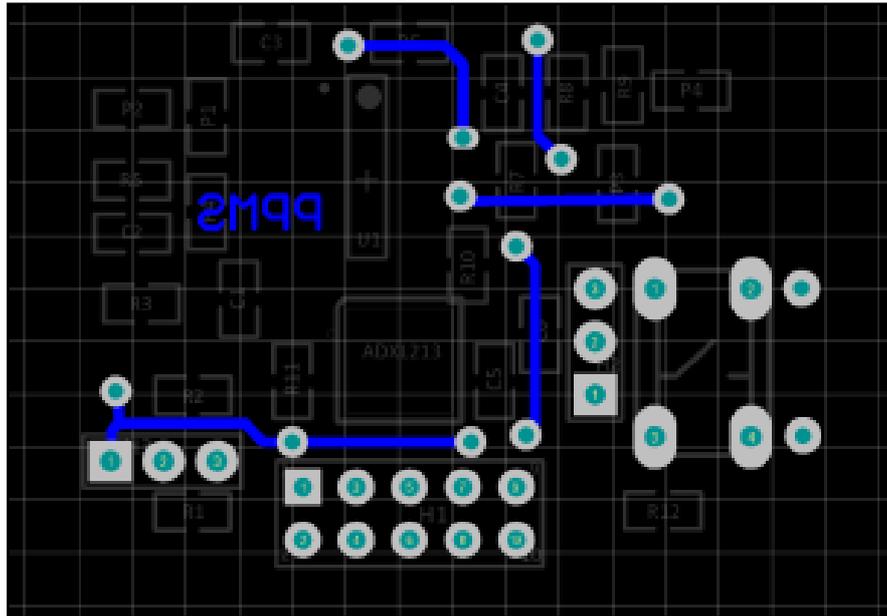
Bottom Layer of the PCB (sensor unit)
